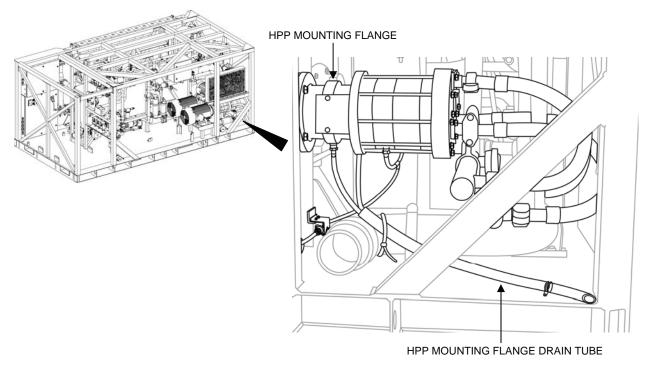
High Pressure Pump Mounting Flange Drain Tube.
